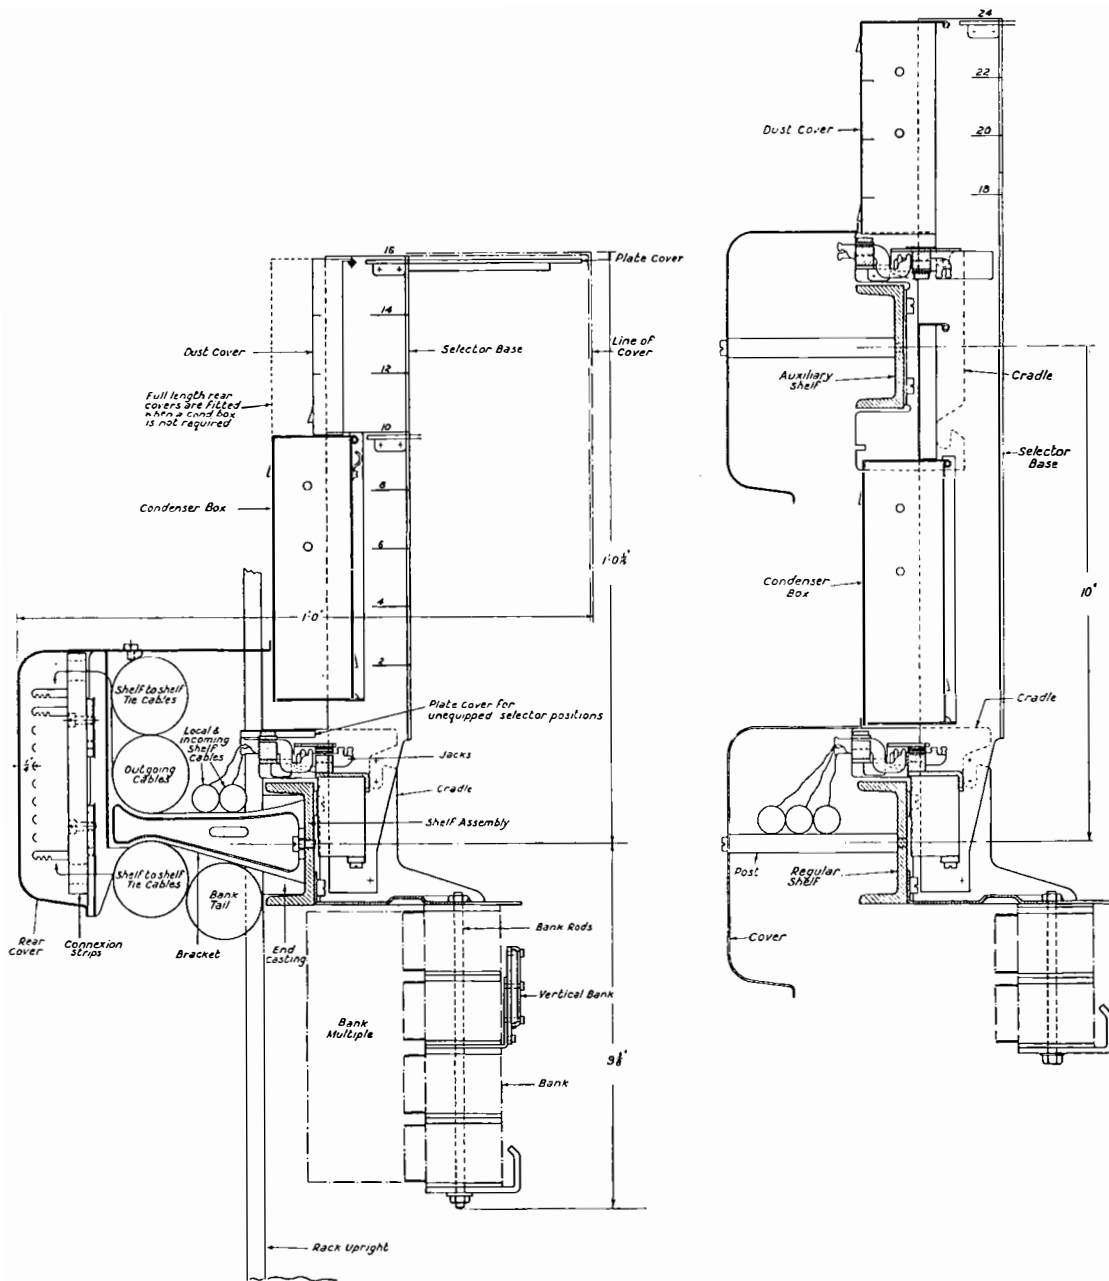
TYPICAL VIEWS OF SELECTOR MOUNTING ARRANGEMENTS.
